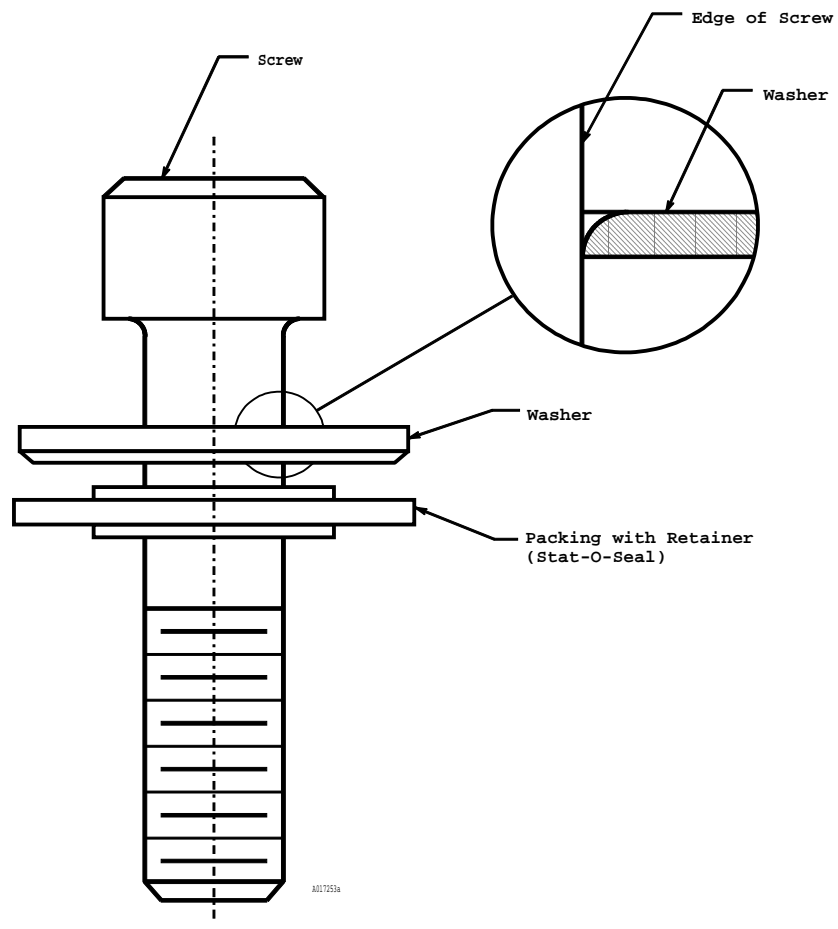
Packing with Retainer, Washer, and Screw Assembly
